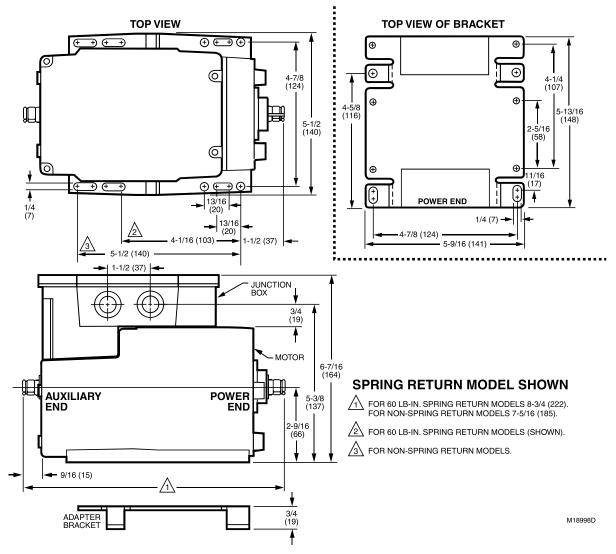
Series 72 Modutrol IV Motor dimensions in inches (mm).
